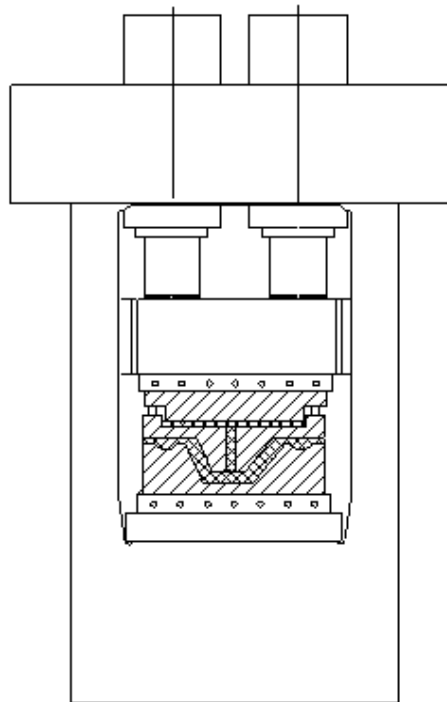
Press for transfer moulding shown with moulding material fed into the moulding cavity
